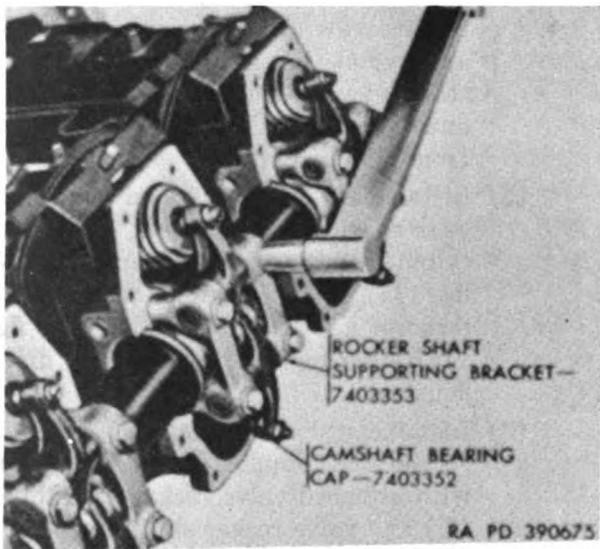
Torquing valve rocker shaft supporting bracket and bearing cap bolts.
